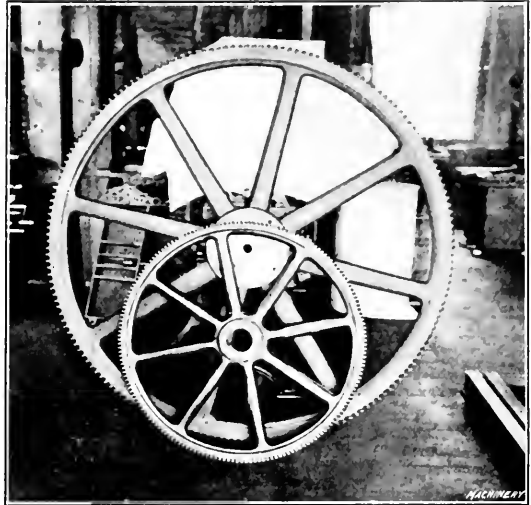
Master Dividing Wheel and One of the Dividing Wheels reproduced from it on the Whitworth Machine shown in Fig. 5
